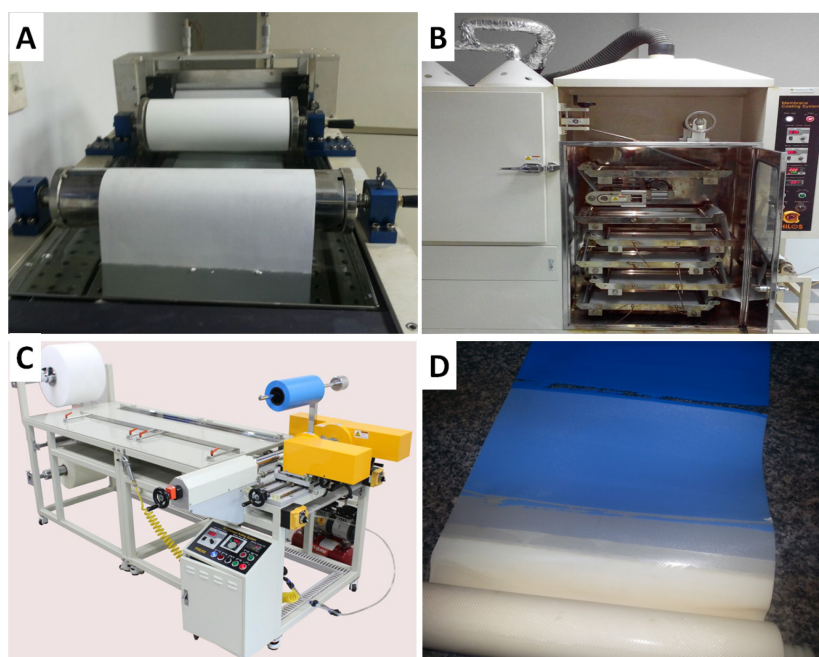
Production of spiral-wound TFC membranes element; (a) PS Casting machine, (b) PA coating machine, (c) Rolling machine, and (d) Spiral wound element.
